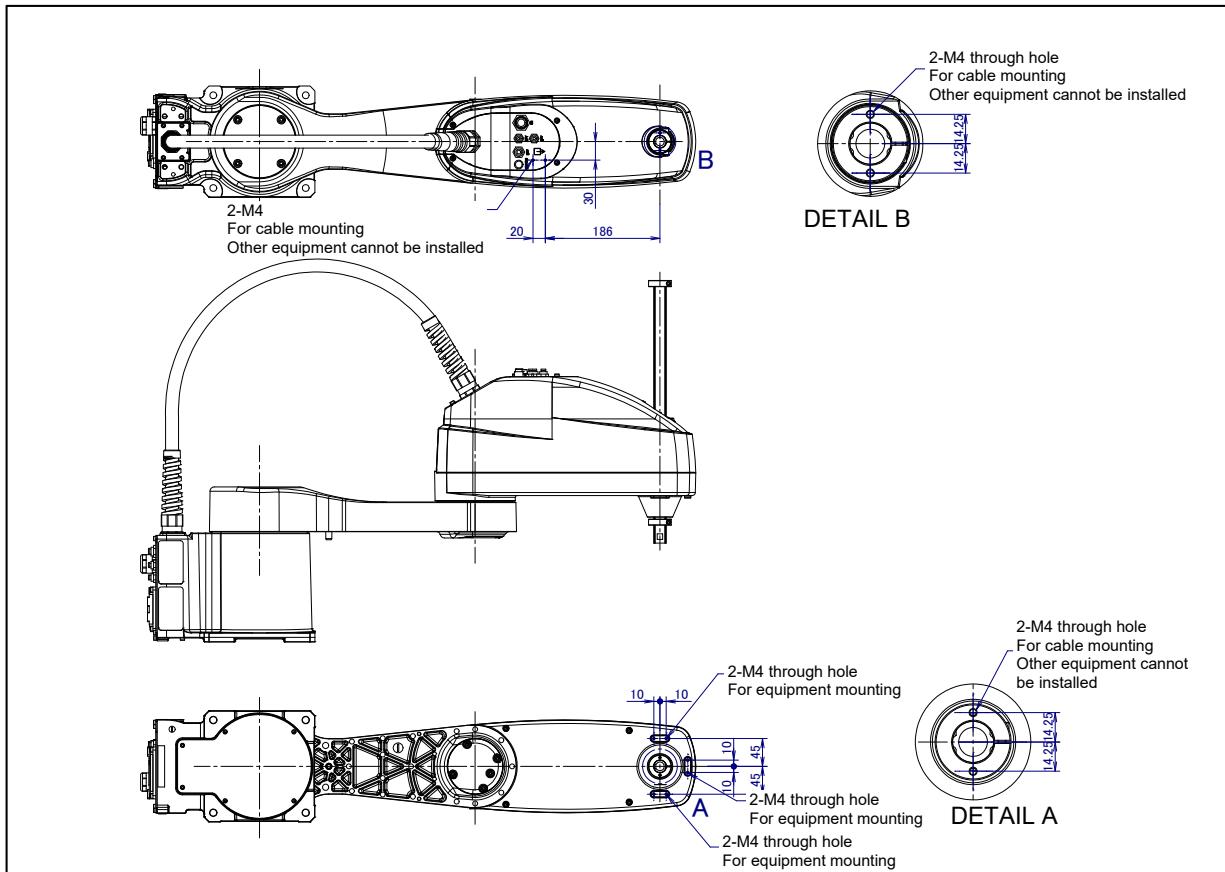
(c) Equipment mounting faces (SR-6iA, SR-6iA/H)
